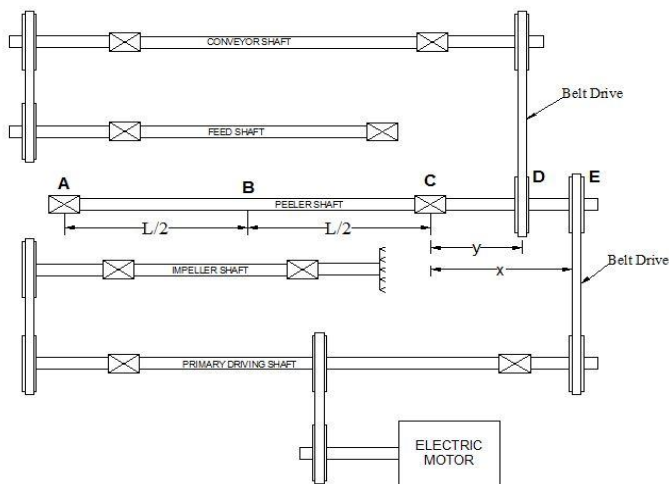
Transmissions and mountings of palm frond broom peeling machine
